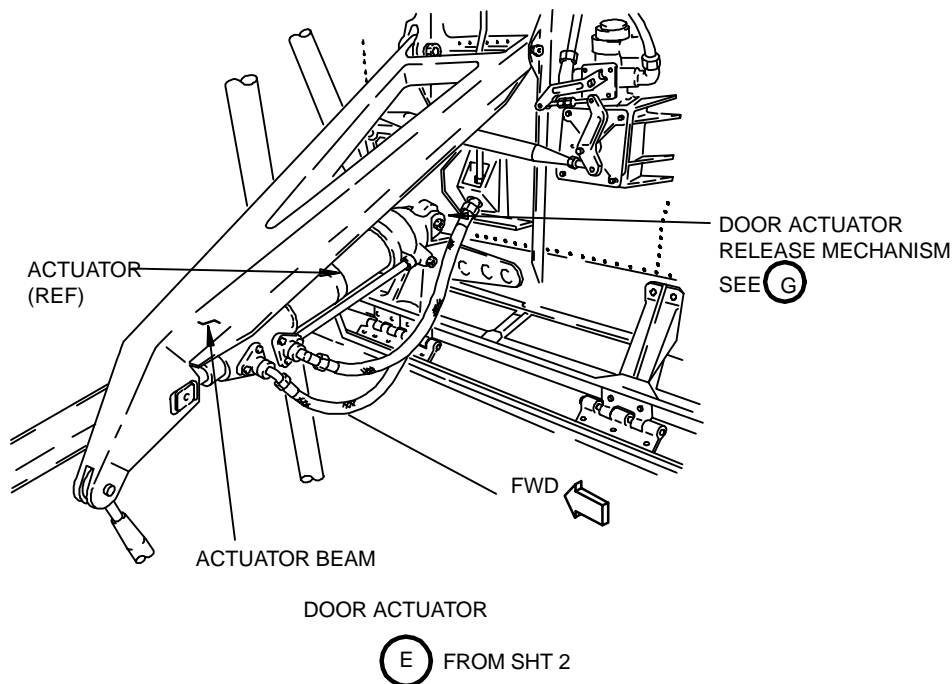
32-36 Wing Gear Alt. Ext. Sys. Comp. Location Fig. 102 (Sheet 1)
